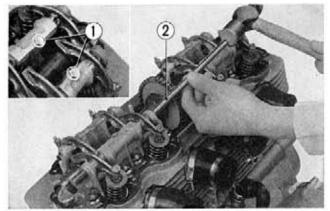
① Rocker arm shaft mounting bolts ② Rocker arm shaft remover
